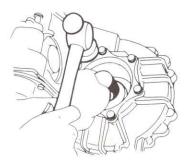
Driving in a new differential bearing oil seal (Sec 10)
